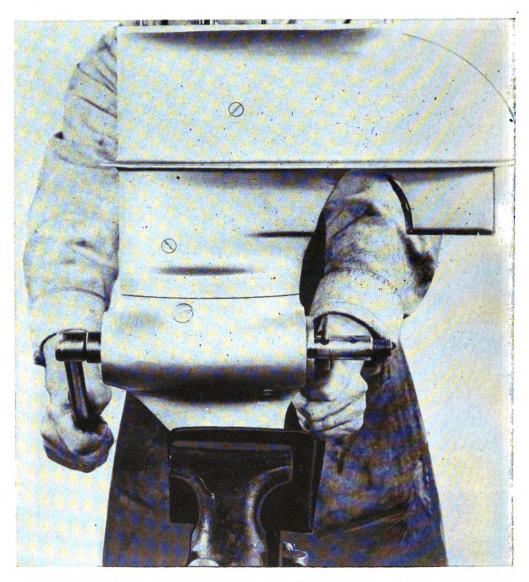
Gearcase assembly held in vice when tightening propeller-shaft nut.
